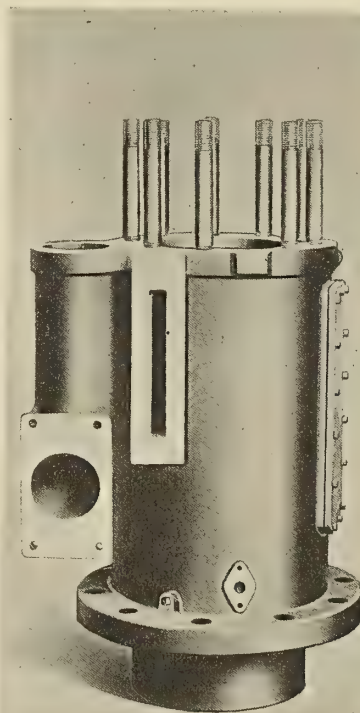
Cylinder, Showing Bolts for Attaching Head
